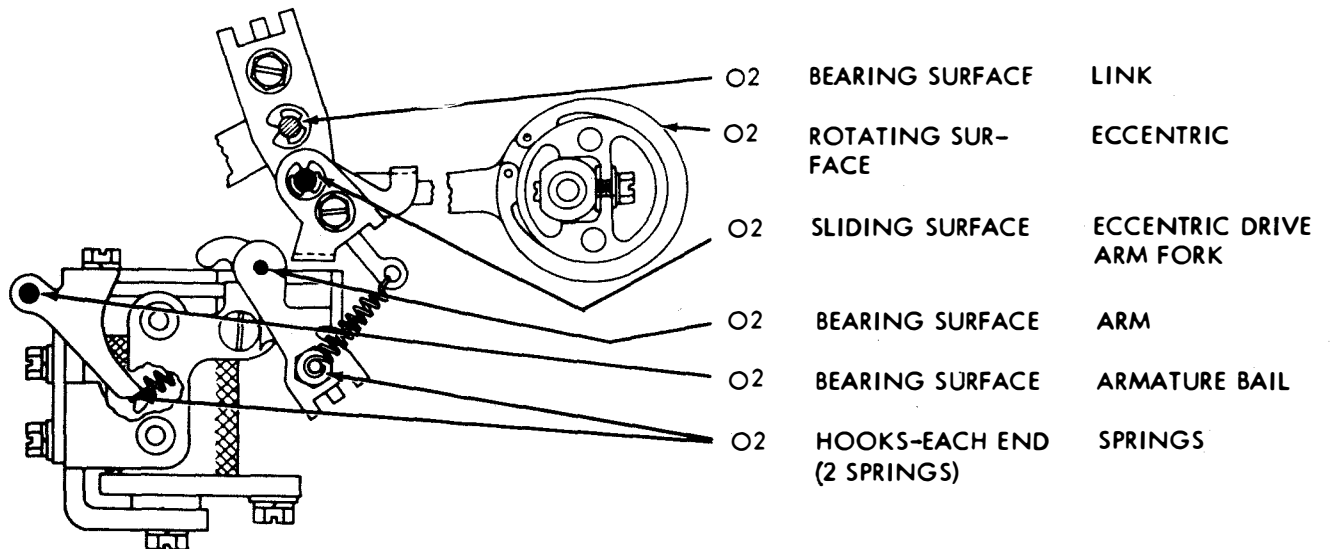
Backspace Mechanism for Chadless Tape, Power Drive
